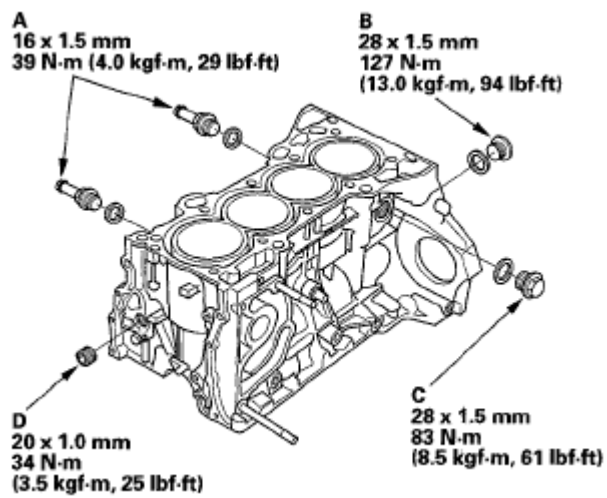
Identifying Sealing Bolts With Torque Specifications
